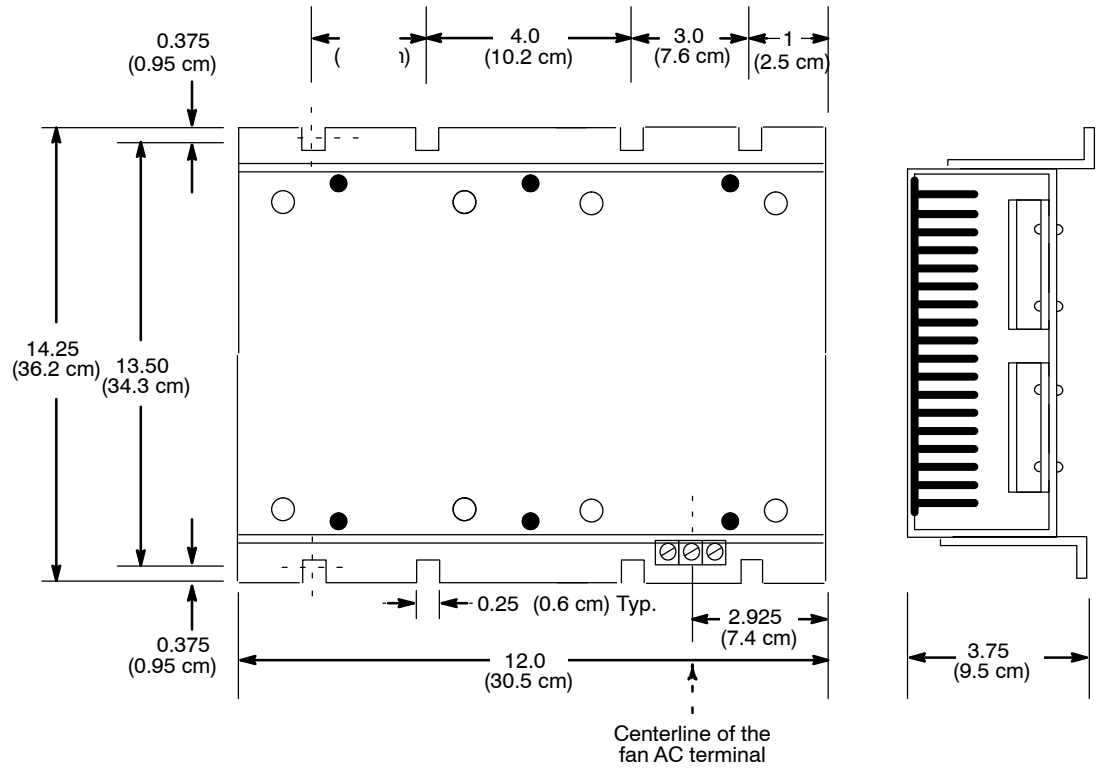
CPM Two-Position Mounting Plate Mounting Dimensions
